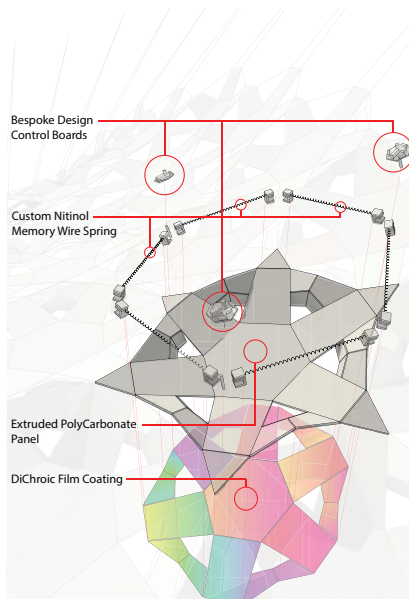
Component assembly featuring polycarbonate panels and laminate dichroic film. The assembly consists of aluminum c-channel brackets, nitinol springs and custom boards with sensors and thermistors.
